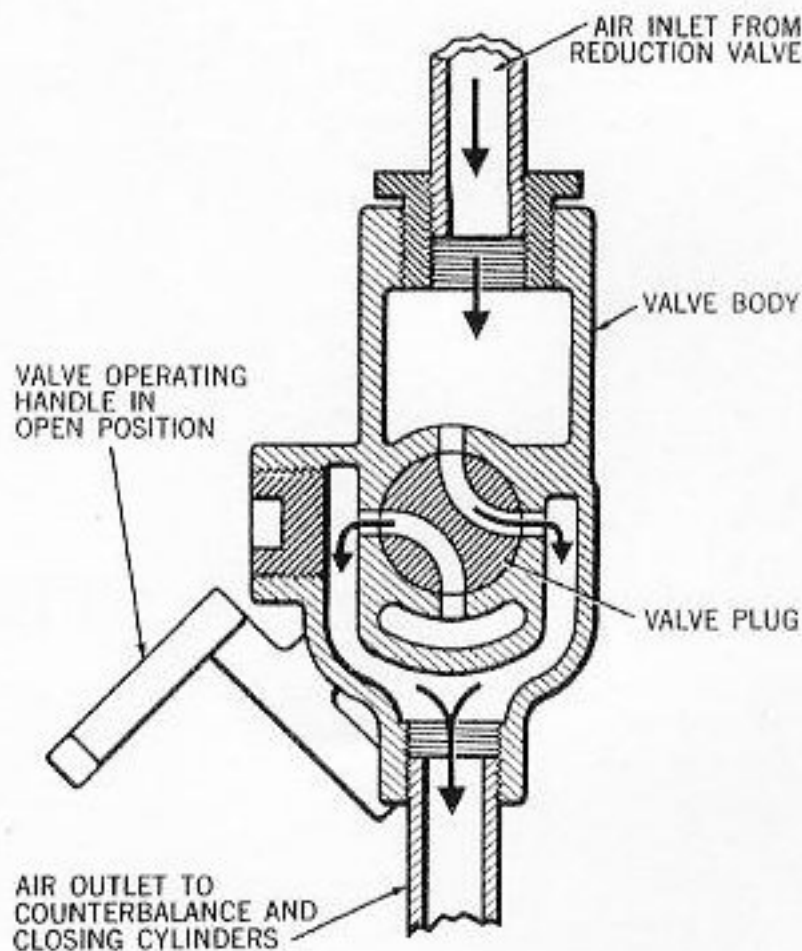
Breech-closing Cylinder Valve, Sectional View
